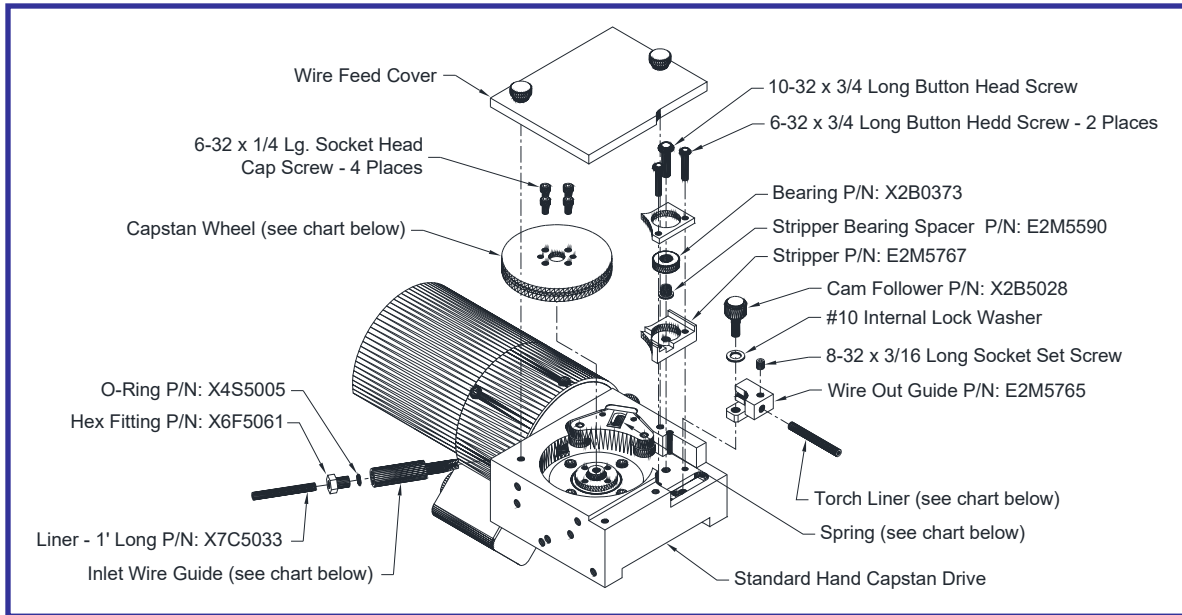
0.030" to 0.052" Aluminum Wire Straightener Standard Hand Wire Drive Configuration
